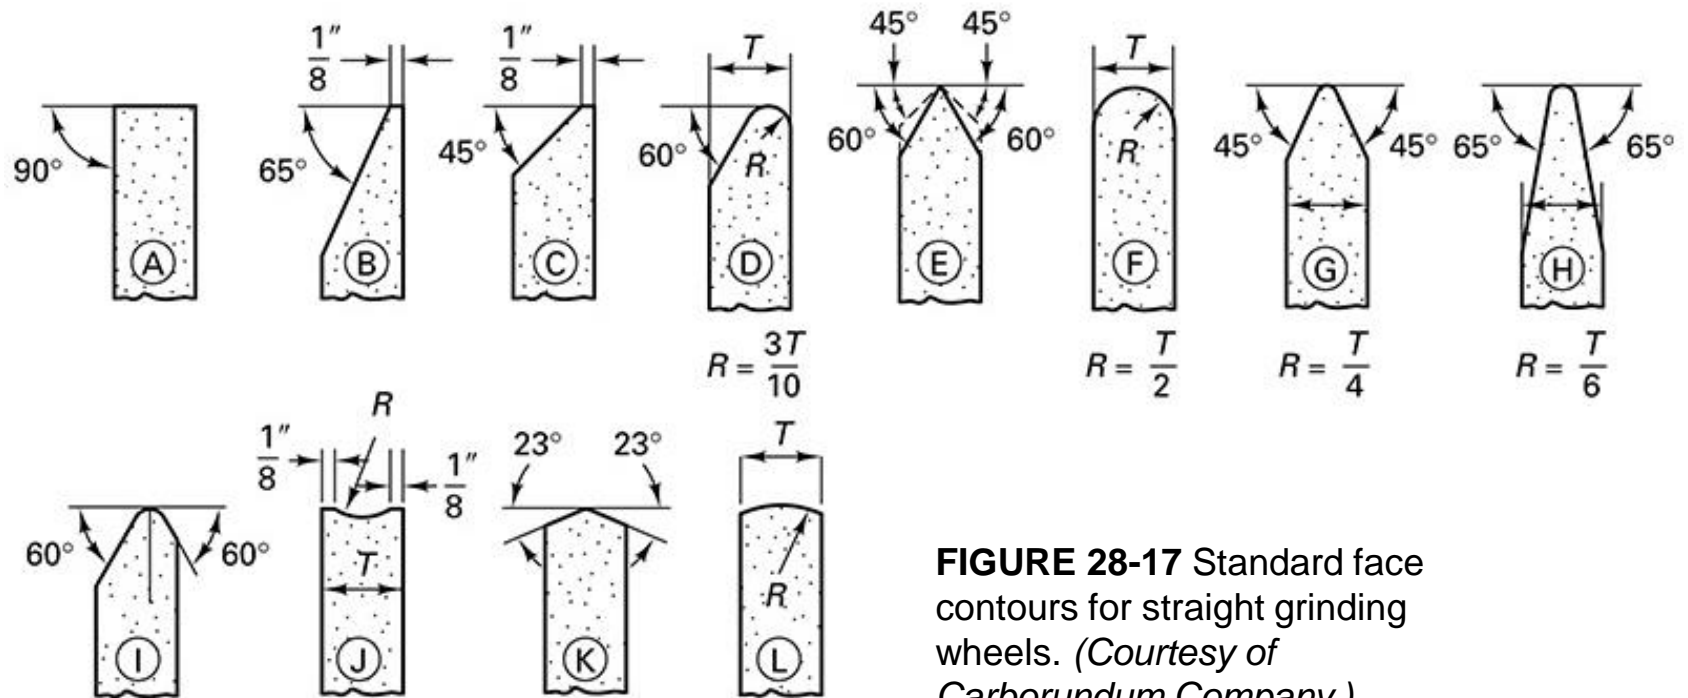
Standard face contours for straight grinding wheels. (Courtesy of Carborundum Company.)
